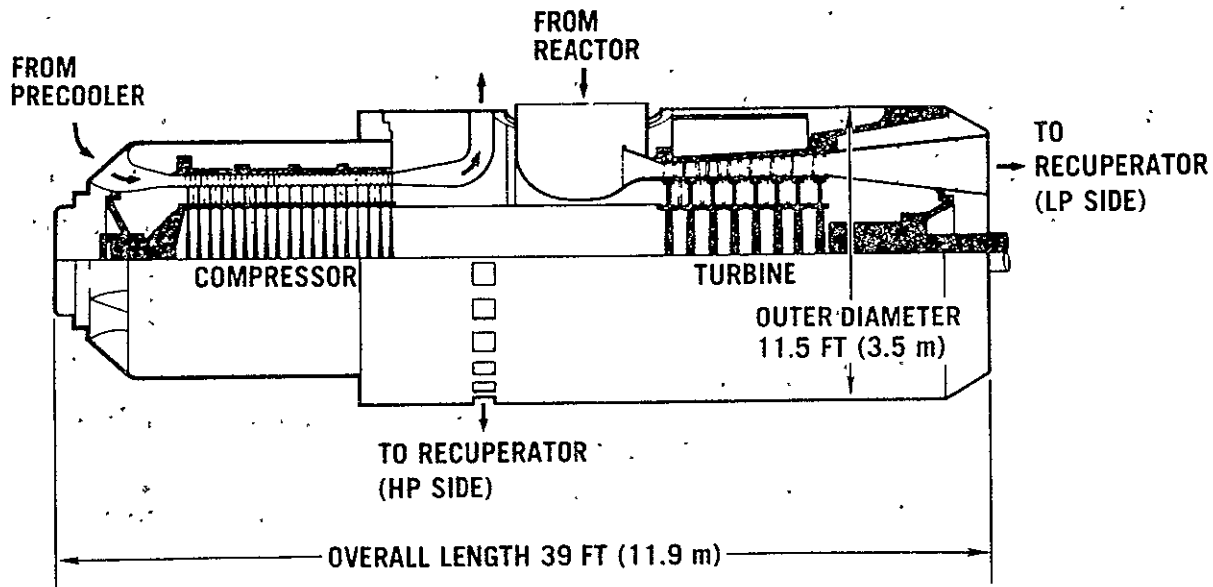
SIMPLIFIED CROSS SECTION SHOWING 370-MWe SINGLE-SHAFT HELIUM TURBOMACHINERY FOR GAS-TURBINE HTGR POWER PLANT³⁹
